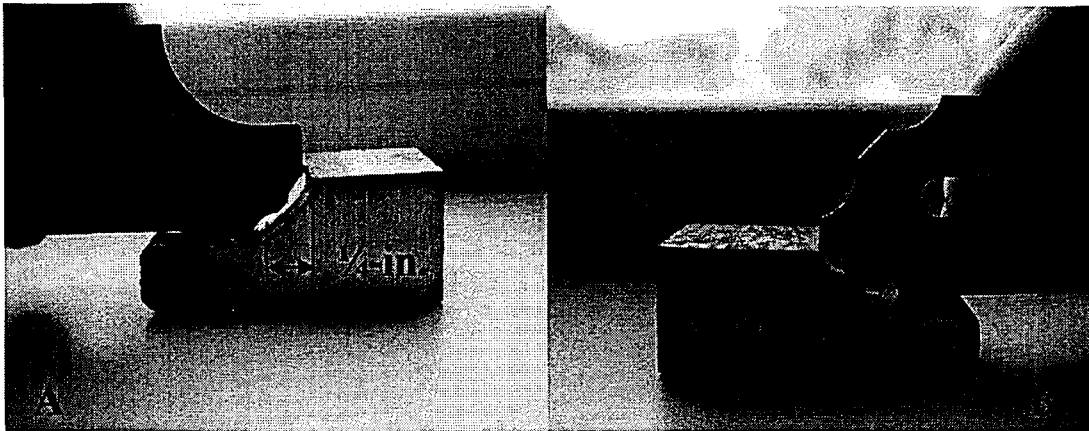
Fillet Weld Gage—Concave Measurement (A), Convex Measurement (B)
